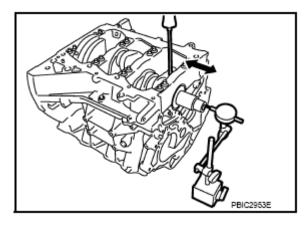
Identifying Crankshaft End Play Using Dial Gauge Courtesy of NISSAN NORTH AMERICA, INC.
